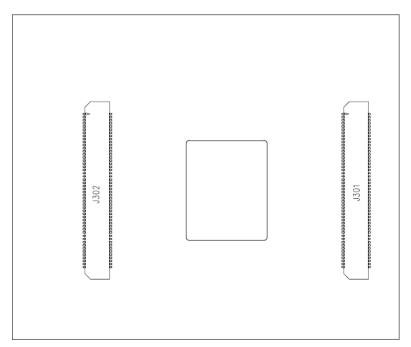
AirPrime SL6087 Socket-Up Board (Bottom View)
